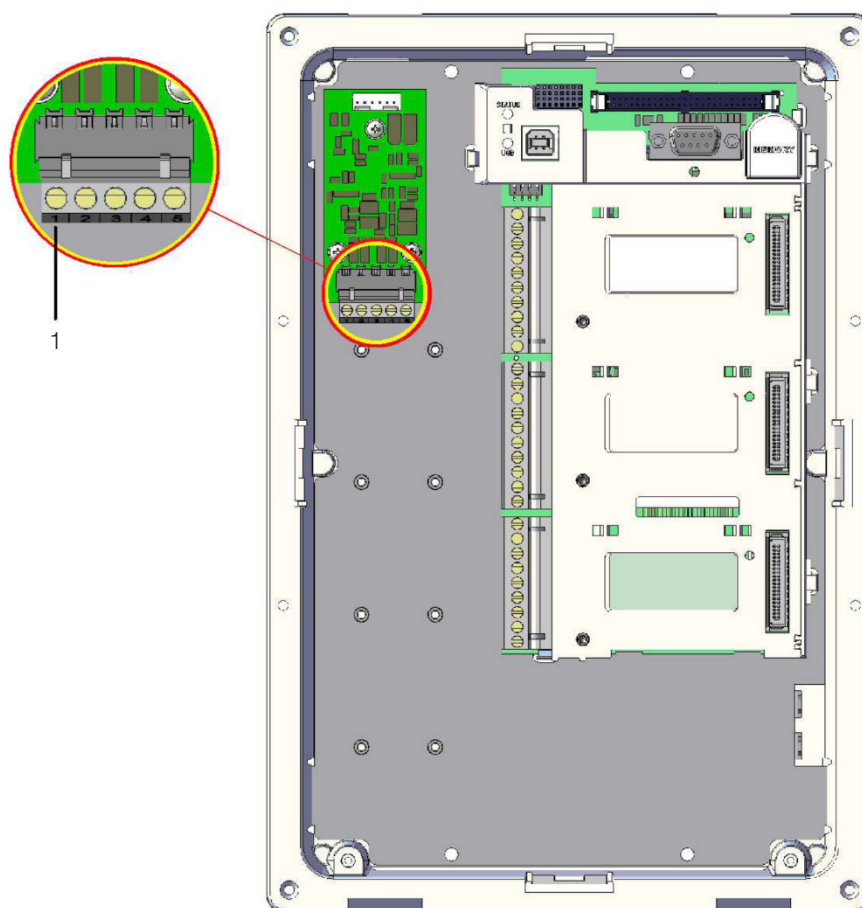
Assembly of the CSR11 board in the UC11RB G2
